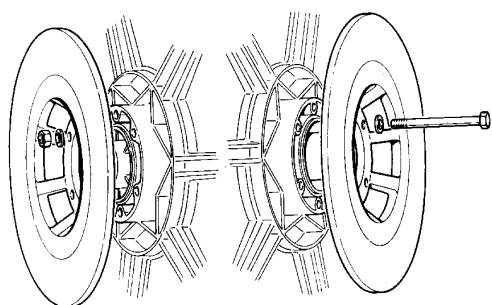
Removing and Replacing the Rear Wheel Brake Discs
